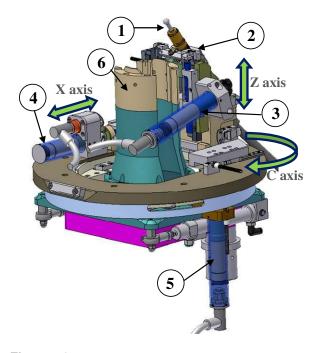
ARG Manipulator overview. Mechanical components: 1 - the grinding head tool, 2- holder for the grinding tool, 3 - Z axis motor (height positioning), 4 - X axis motor (radial positioning), 5 - C axis motor (rotation positioning), 6 - centering and fixing system used to attach to the CRDM Nozzle
